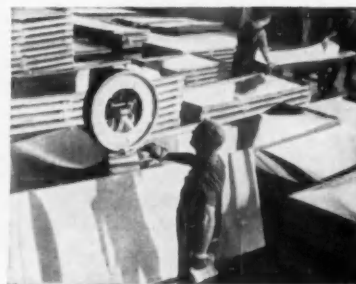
types including special low carbon steel plates for forming and welding, leaded New E-Z-Cut, etc.
